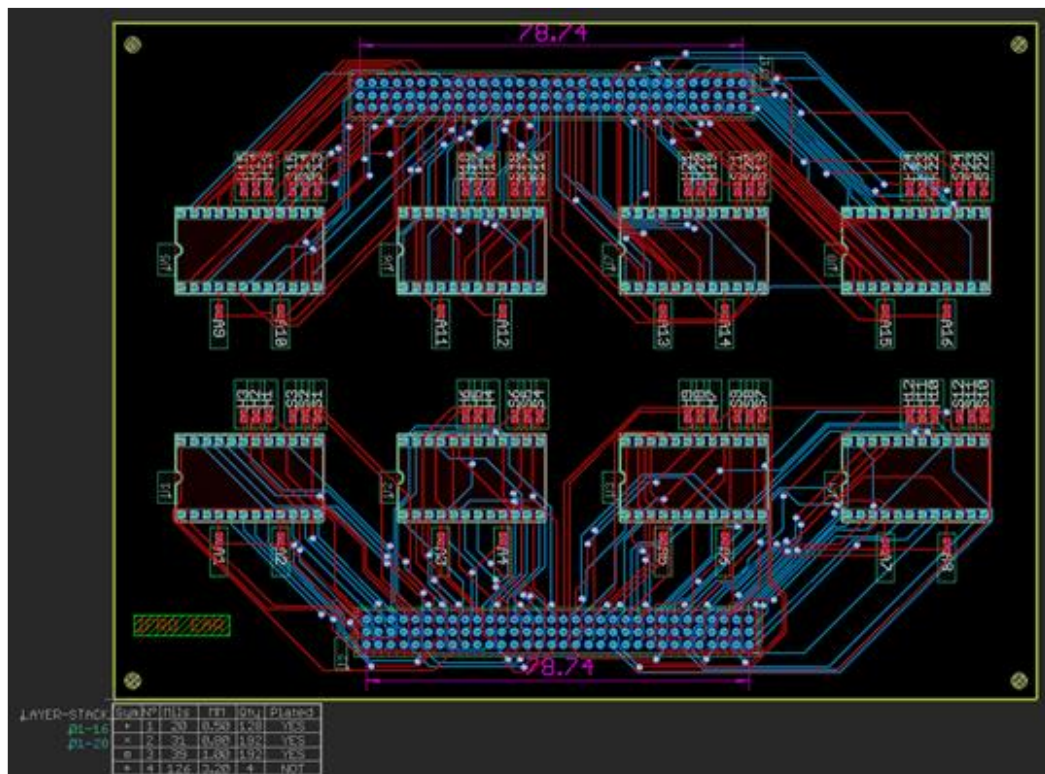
Layout of the burn-in PCB is used for mounting the devices in ceramic C-DIP-24 packages. The PCB contains 8 sockets for 8 ceramic chips and 2 connectors with 92 pins each. The connectors are used to establish the connection between the *DUTs* and the external control and monitoring test system. All PCB components can sustain up to 125°C.
